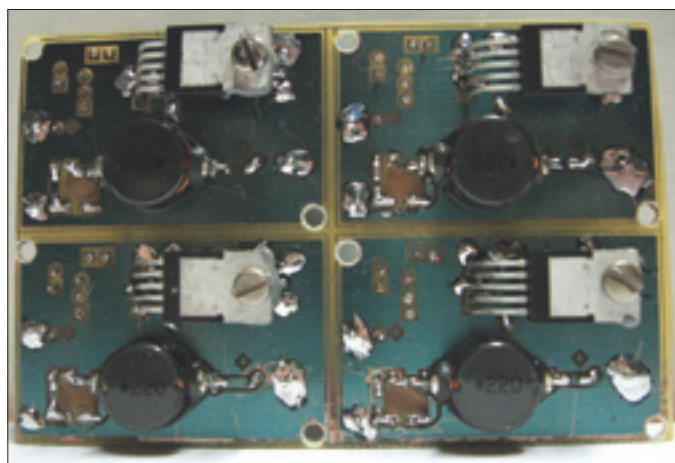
Back side of the PCB assembly with the ICs folded over and the bolts holding the nuts in place while the epoxy hardens.
